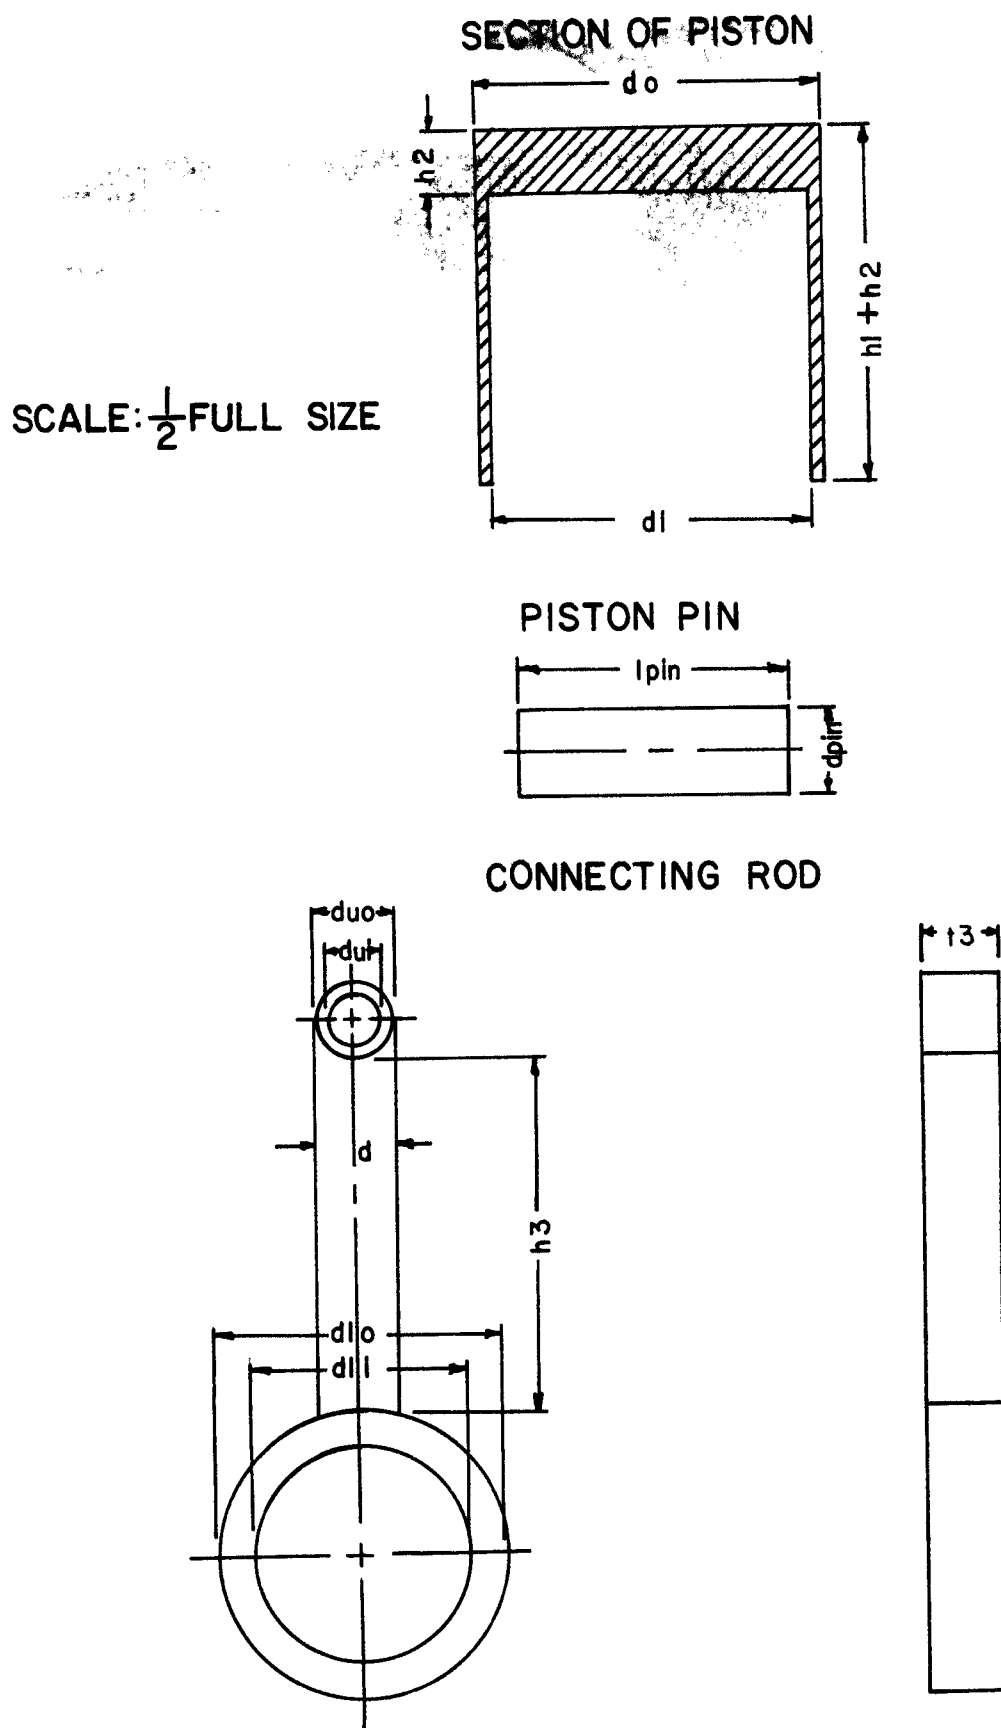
Connecting Rod, Piston Pin and Piston of Cortina 2000 c.c. Engine
